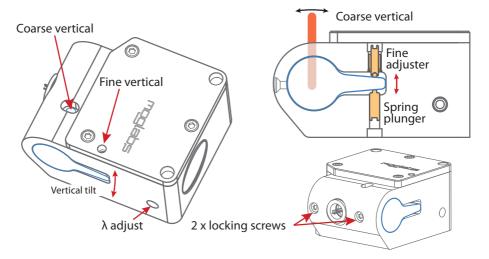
Sketch showing location of vertical alignment adjustments: a fine adjustment screw, and for coarse adjustment, a 5 mm diameter hole in which a screwdriver can be inserted.
